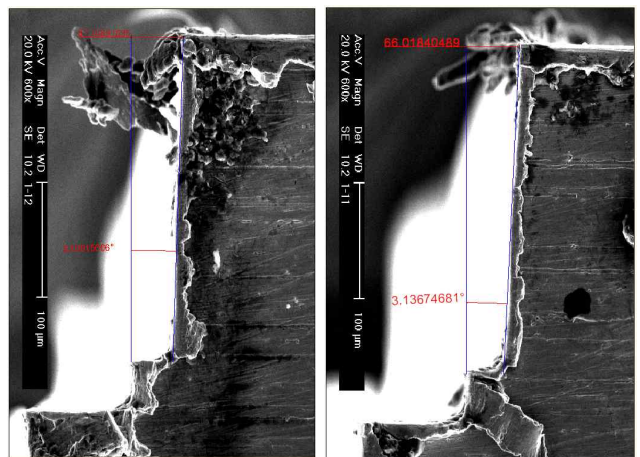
Machined profile (FD=250mm/min, RD=50µm)
